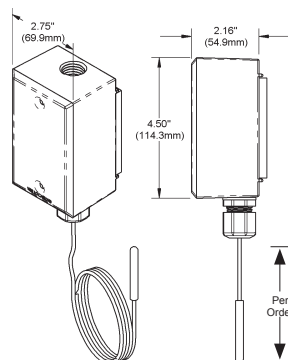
Stainless Steel Remote Probe in a Weatherproof (WP) Enclosure
